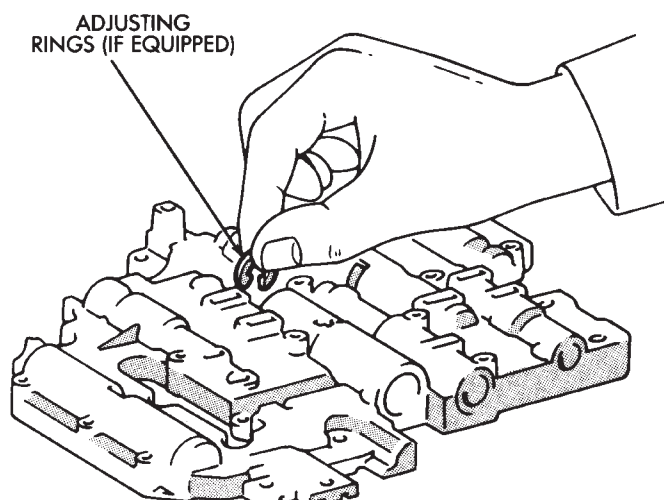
Install Throttle Valve Adjusting Rings (If Equipped)
